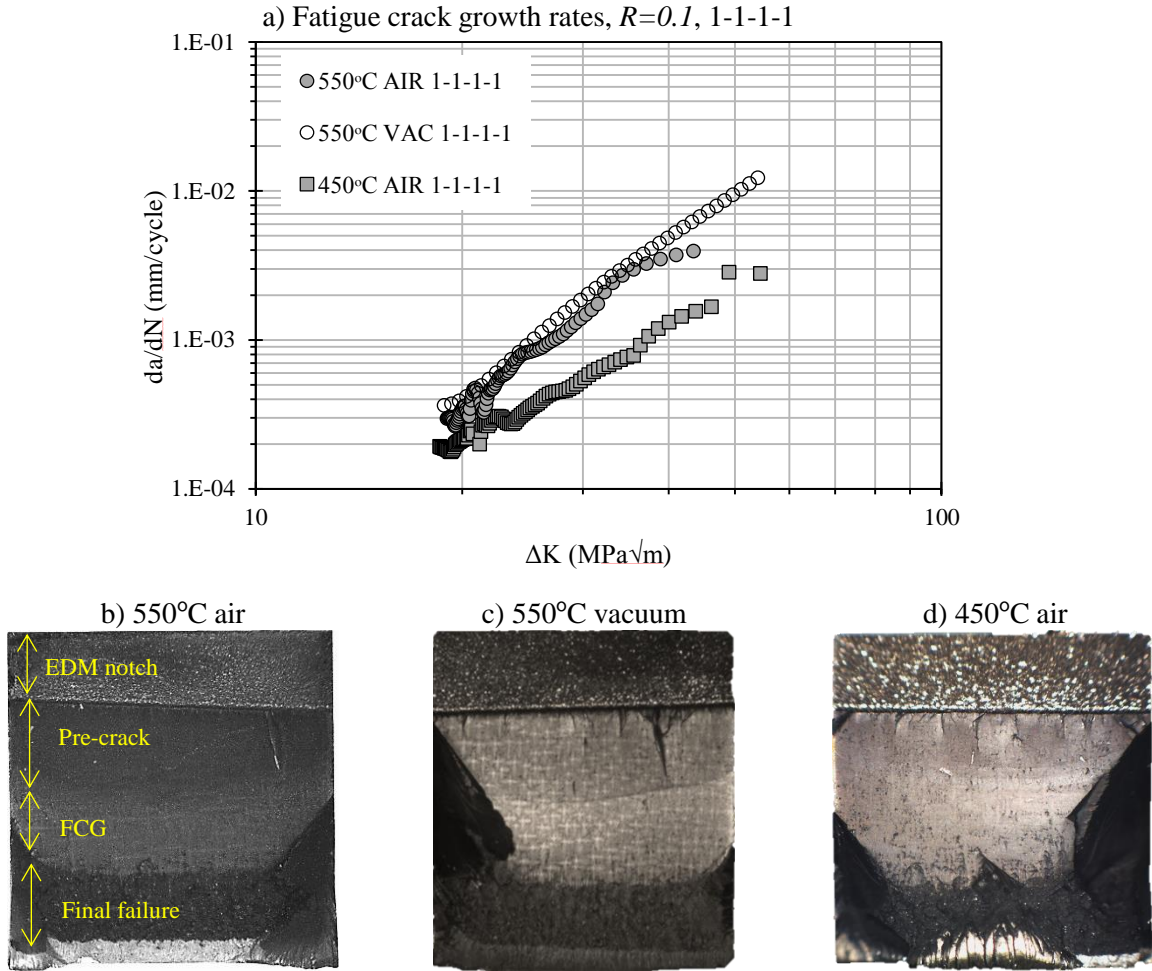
(a) Fatigue crack propagation rates in air and vacuum for CMSX-4 at 550°C, (b) & (c) overviews of the fracture surfaces of the air and vacuum tests.
